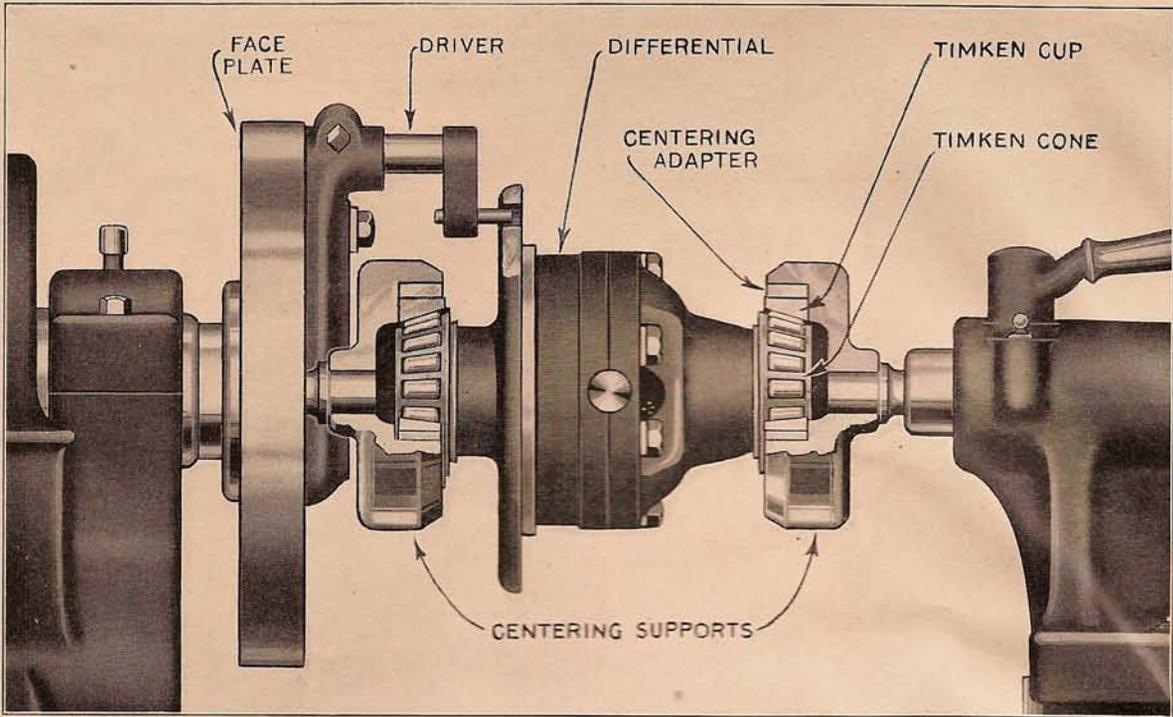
Cut-away Section of Special Differential Centering Supports used for Mounting Differential Cases in the Lathe for Testing and Truing the Ring Gear Flange.
